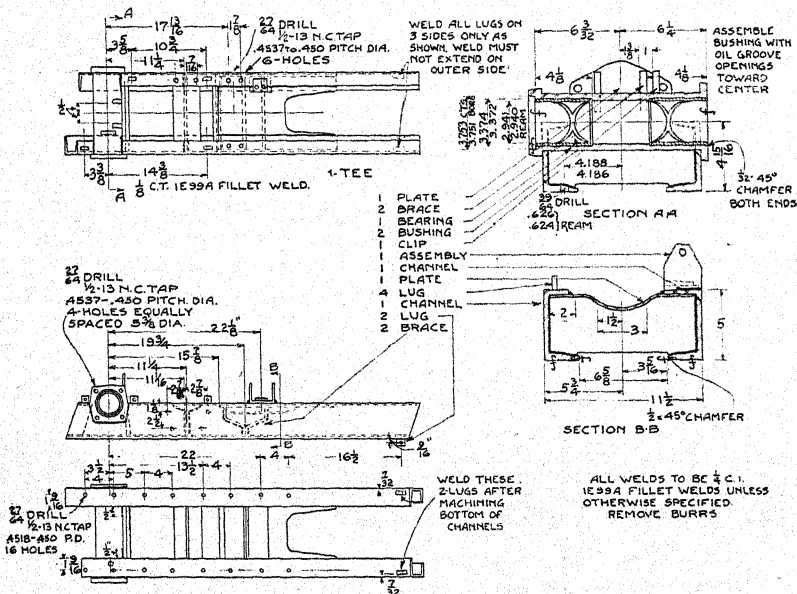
Working drawing of the arc welded track roller frame assembly.
